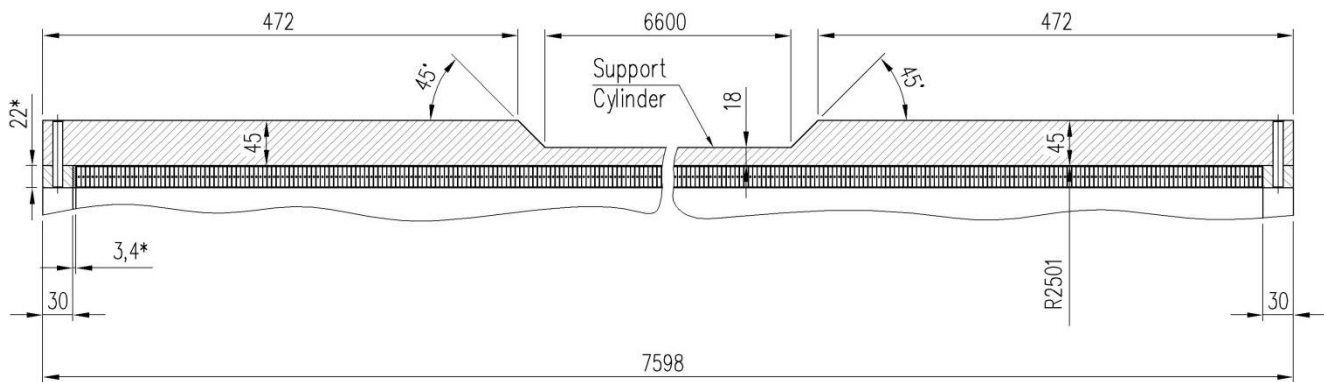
Support cylinder with the superconducting coil (the dimensions are given for the “warm” state)
